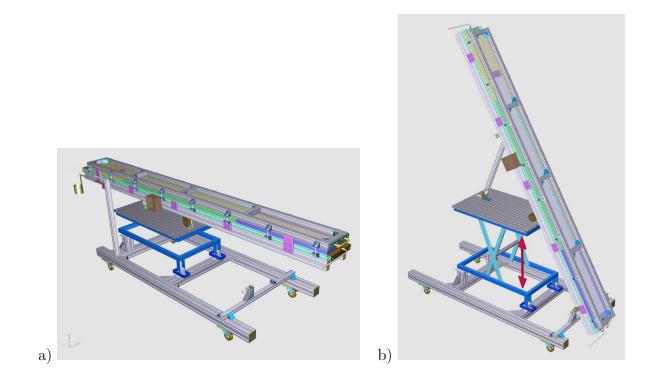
a) Casting jig in working position, b) Jig in casting position
